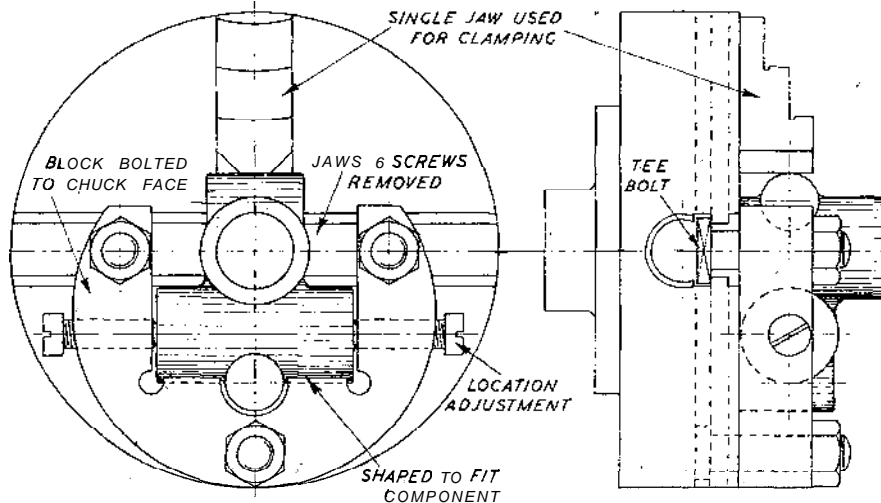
An example of how the four-jaw chuck can be adapted as a chucking jig for awkwardly-shaped components.
